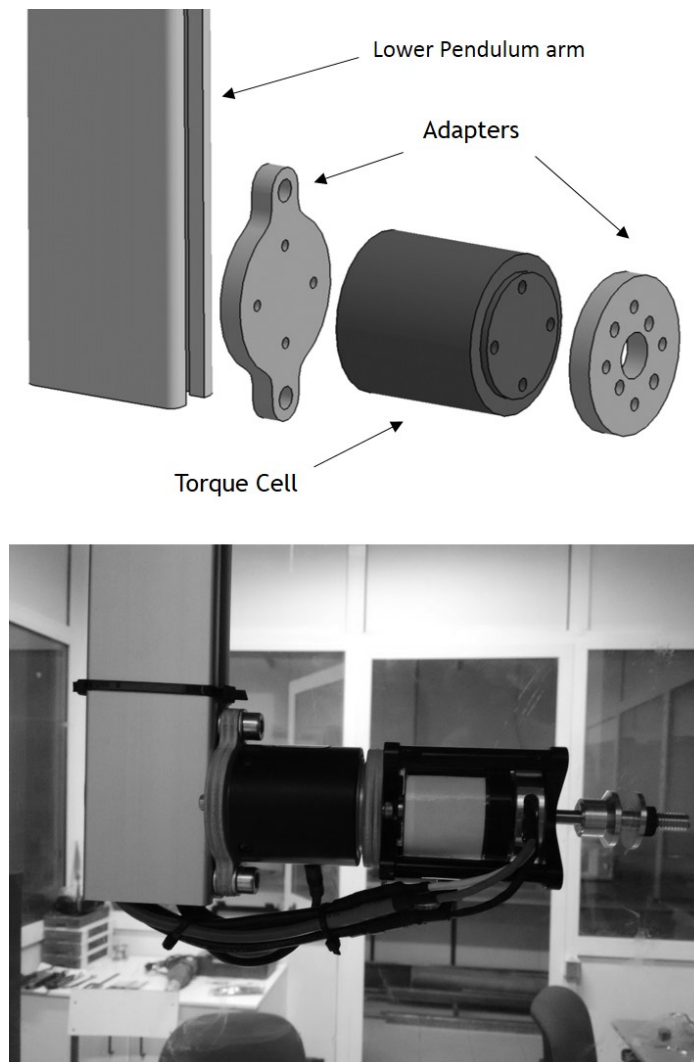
Scheme (top) and a photograph (bottom) of the assembly between the motor and torque transducer to the pendulum structure.
